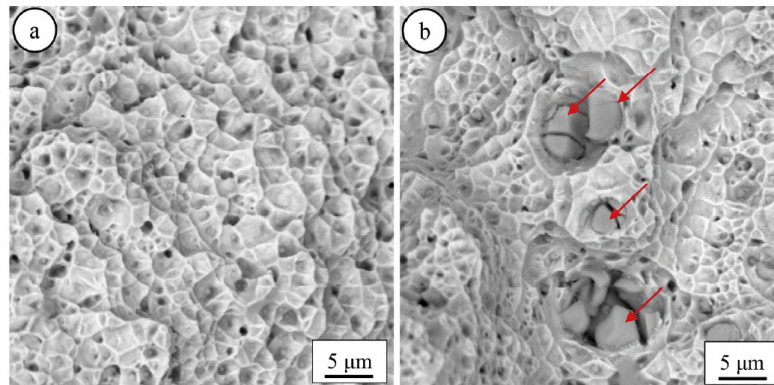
Tensile test fracture surface of a sample produced by: (a) fresh powder and (b) recycled powder. Red arrows point to fractured coarse oxides [44].
